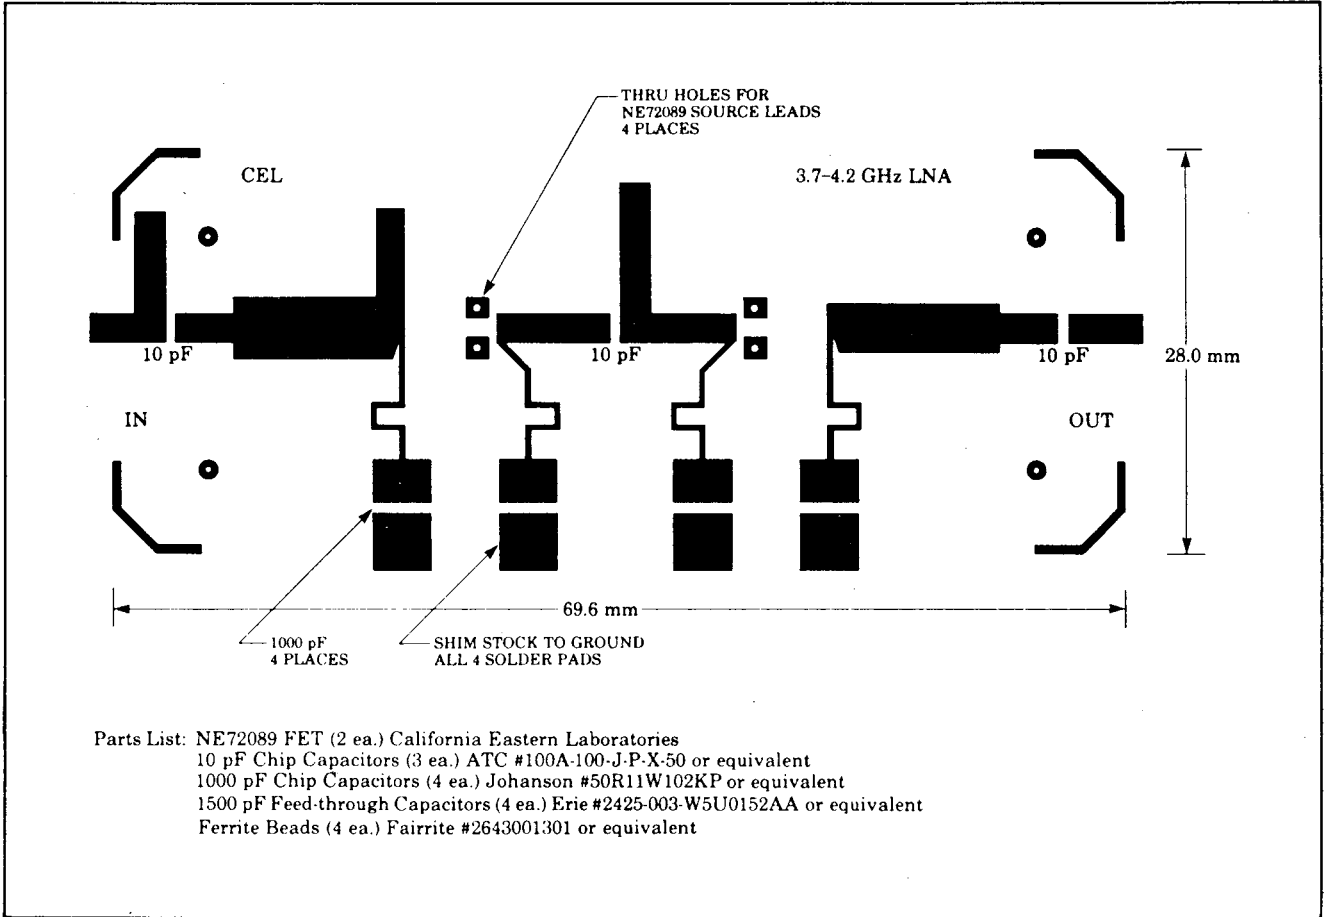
PCB Layout of a 2-Stage Amplifier in the 3.7 GHz-4.2 GHz Band (actual size)
